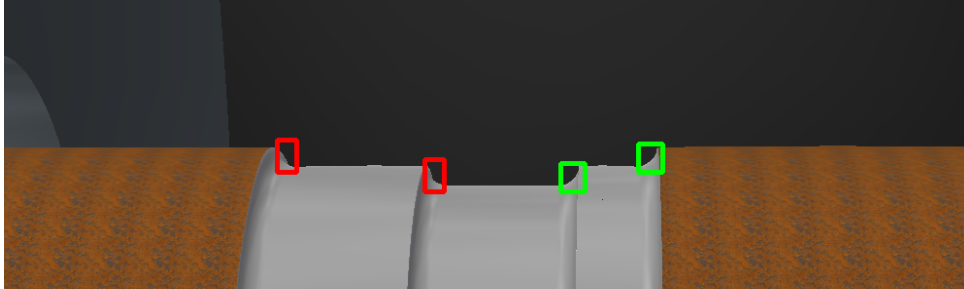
Drill-pipe 3. Detected weld start and stops for multiple grooves
